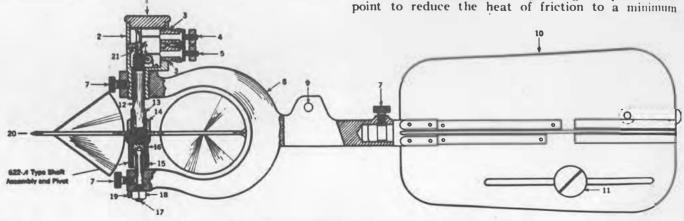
Small Price Current Meter with Improved Pivot and Bearing 622-A Type of Assembly
